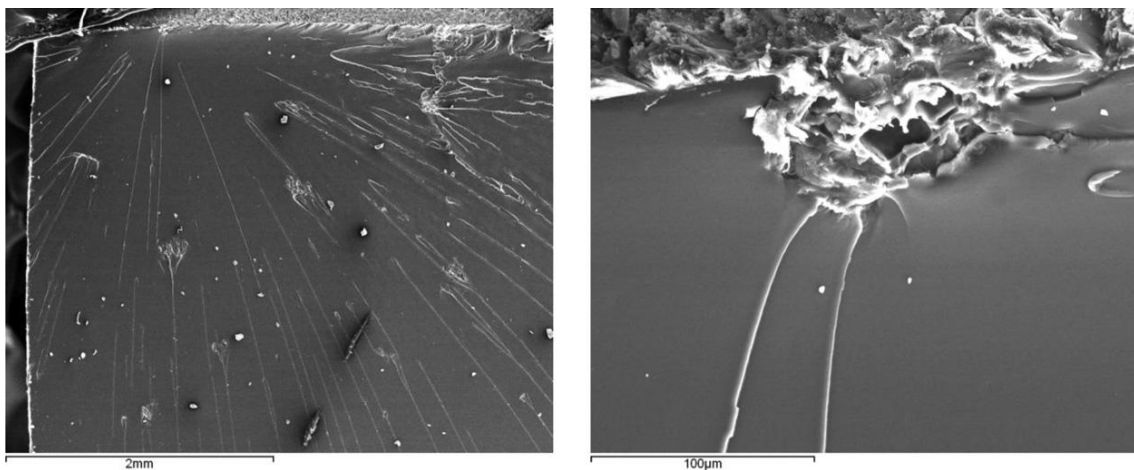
Fracture surface of a specimen with 5% of untreated cork (125–250 μm). Left—overview of fracture surface; Right—detail of fracture surface.
